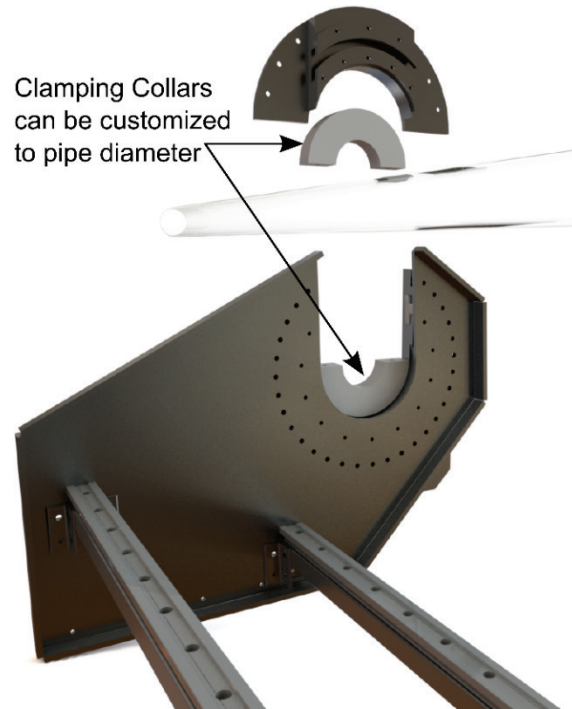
Exploded view of imager endmount. In the neutral position (as shown) the top section can be removed to allow for insertion of the conveying line.
